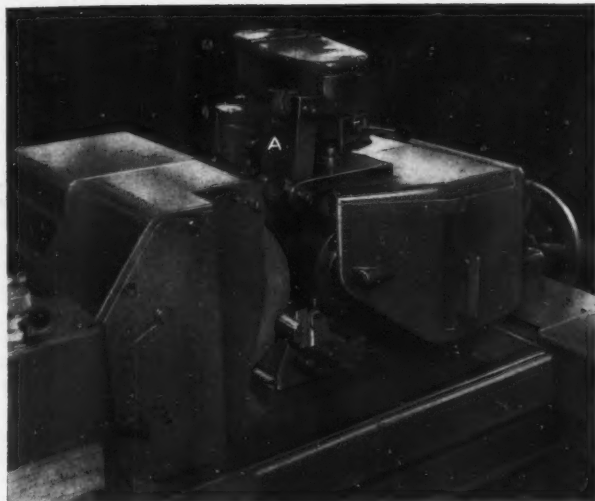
Close-up view of a Scrivener No. 1 centreless machine fitted with a roll crushing attachment and set up for grinding roller comb components for electric shavers
